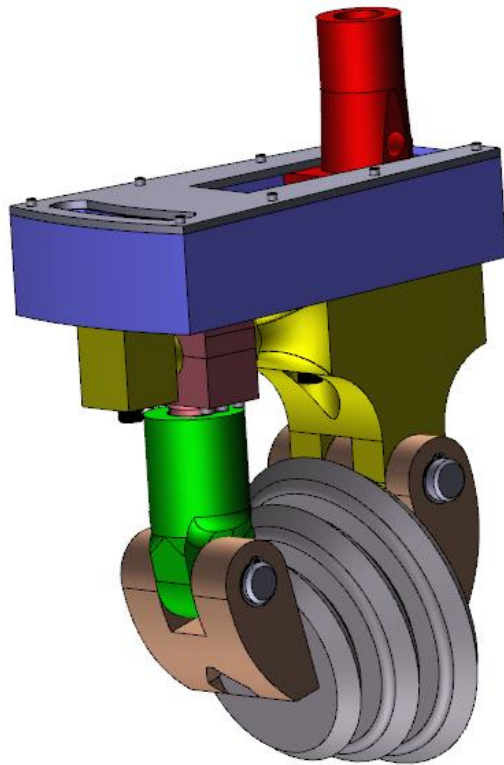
Adjustable Disc Cutter Mounting (ADCM) system.
